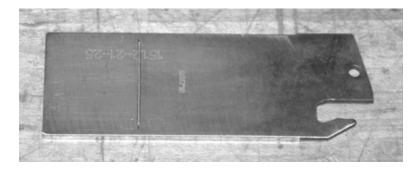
The indicator line on the tool is used to align it in the tool block on the slides.
